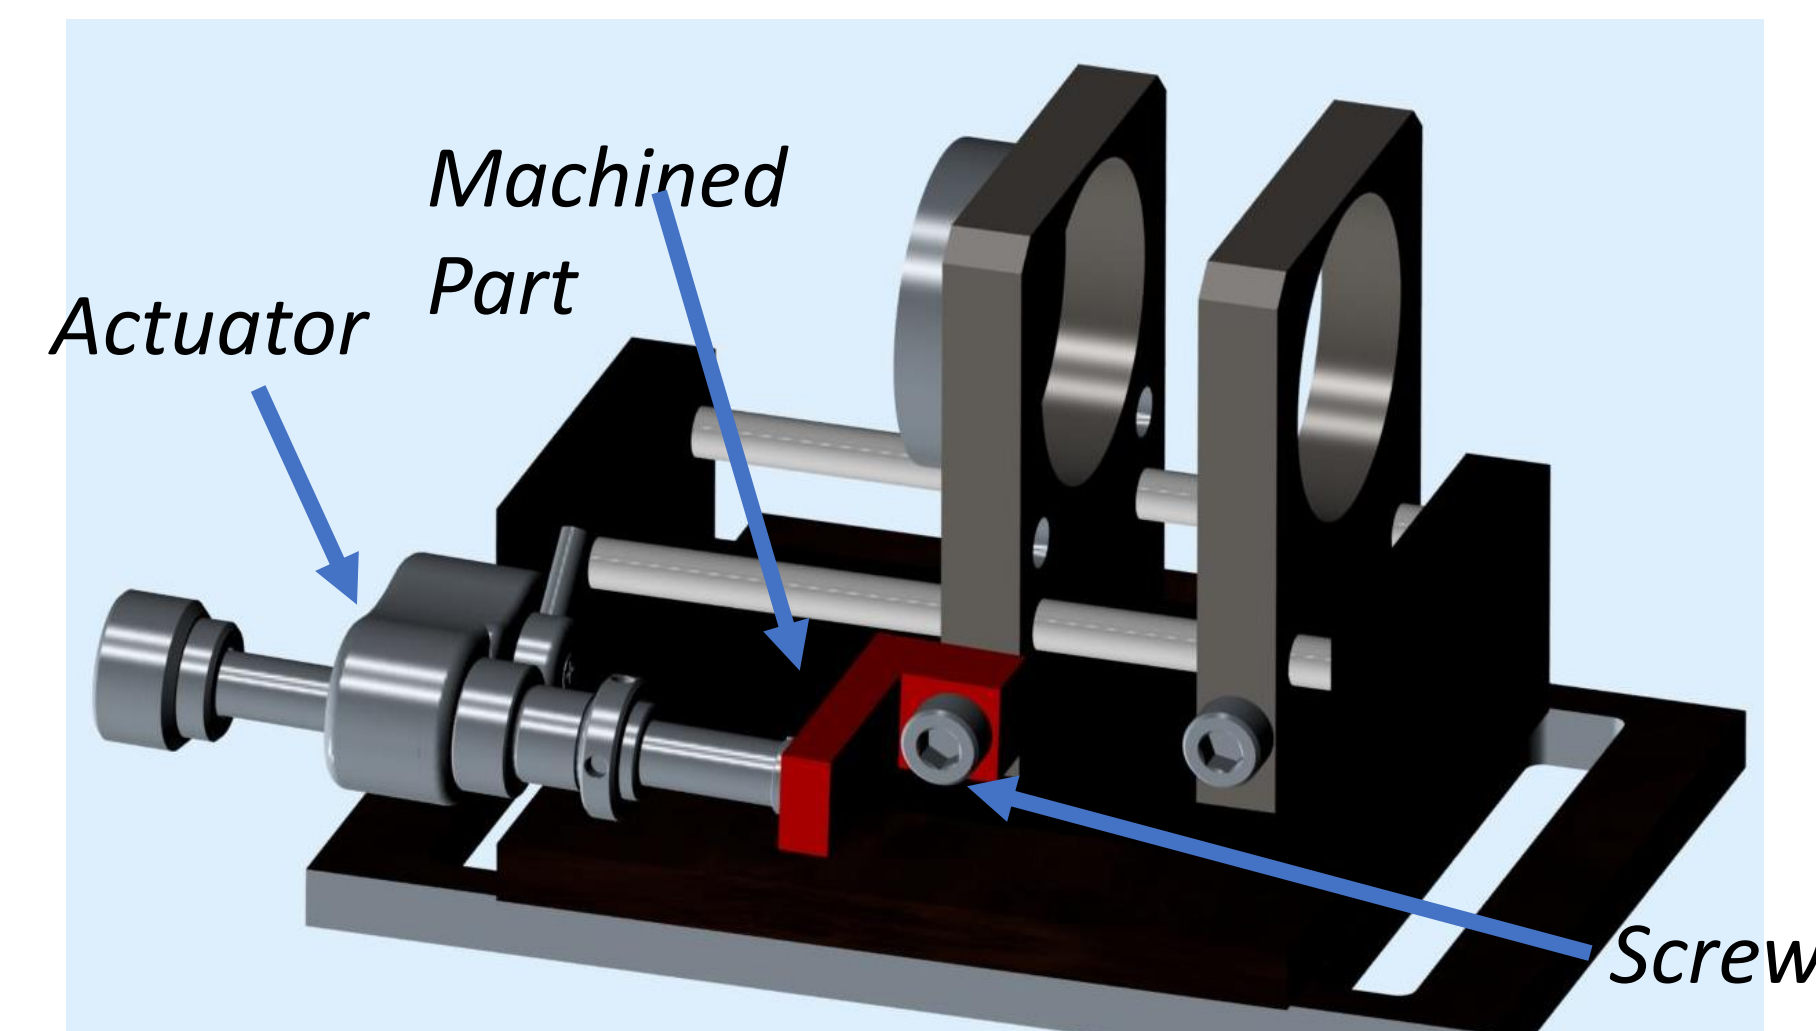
A machined part is attached to the lens and held together by a screw. This machined part is mounted to the actuator which moves the lens accordingly. This simple design accomplishes most of the design goals.
